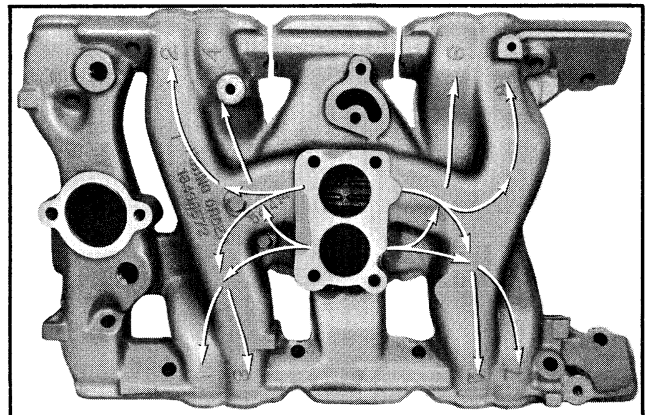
Intake Manifold - Two Barrel Carburetor
